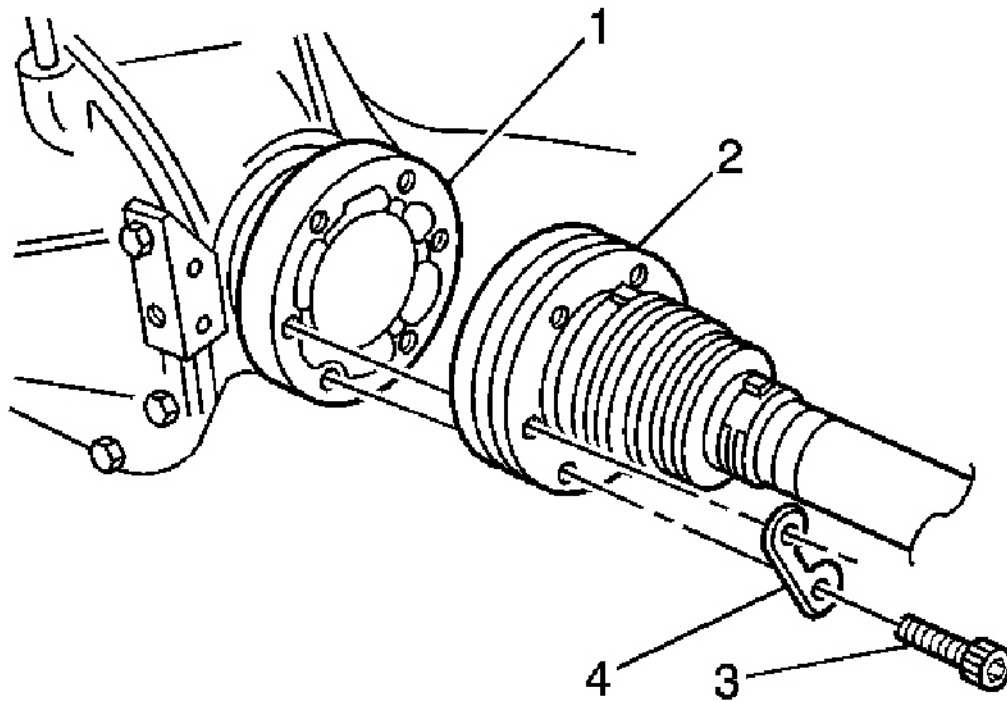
View Of Inner Constant Velocity Joint Retaining Plates & Bolts
